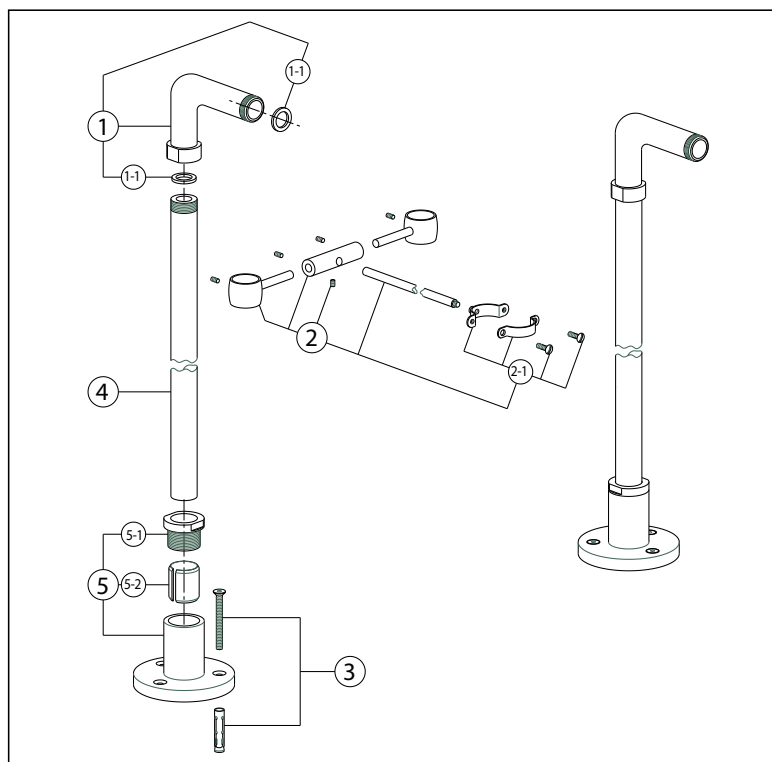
Drill a hole using a 13/32" drill and install floor anchors (3).
